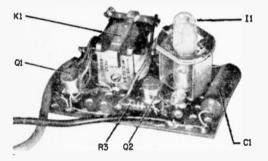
Basic parts layout may seem a bit crowded—parts placement is not critical. Pilot-lamp jewel bezel threads into ring of pilot-lamp assembly that surrounds lamp 11.
